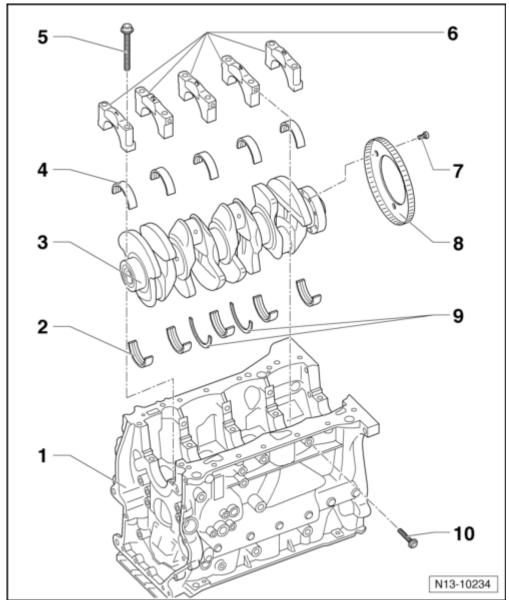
Identifying Assembly Overview: Crankshaft Courtesy of AUDI OF AMERICA, LLC
